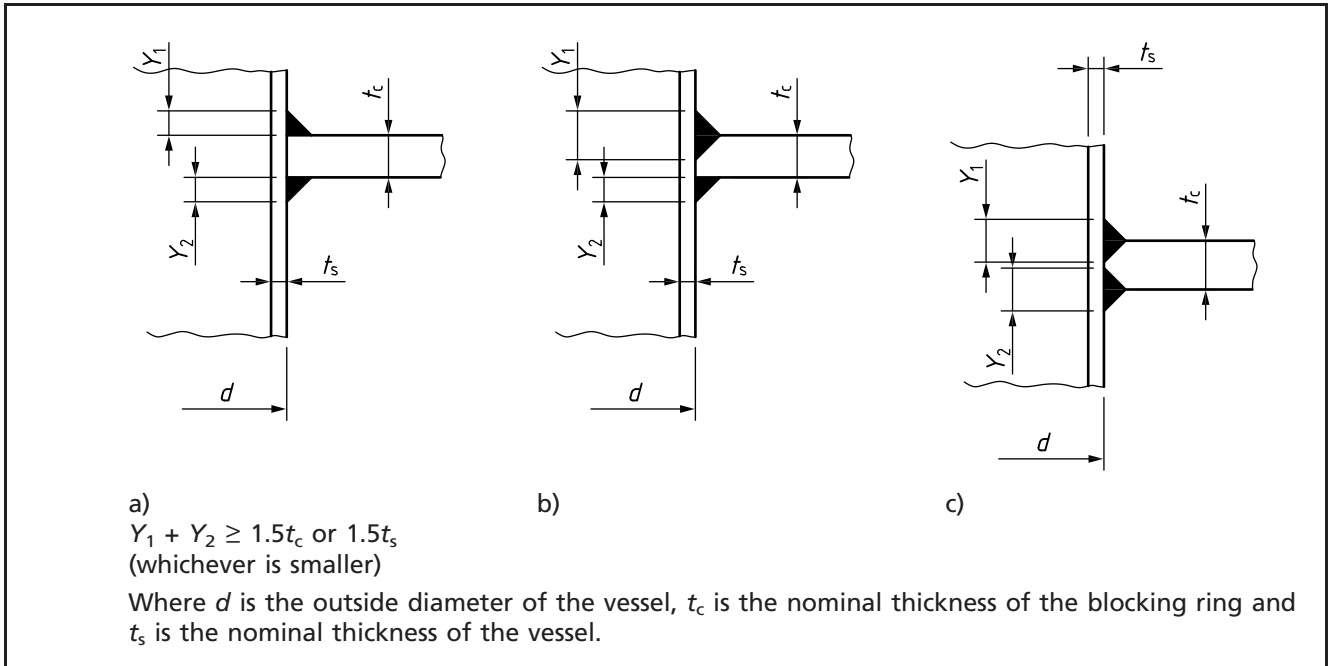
Jacketted vessels: typical blocking ring/jacket attachments (see E.2.5.1, E.2.5.5 and E.2.5.7)
